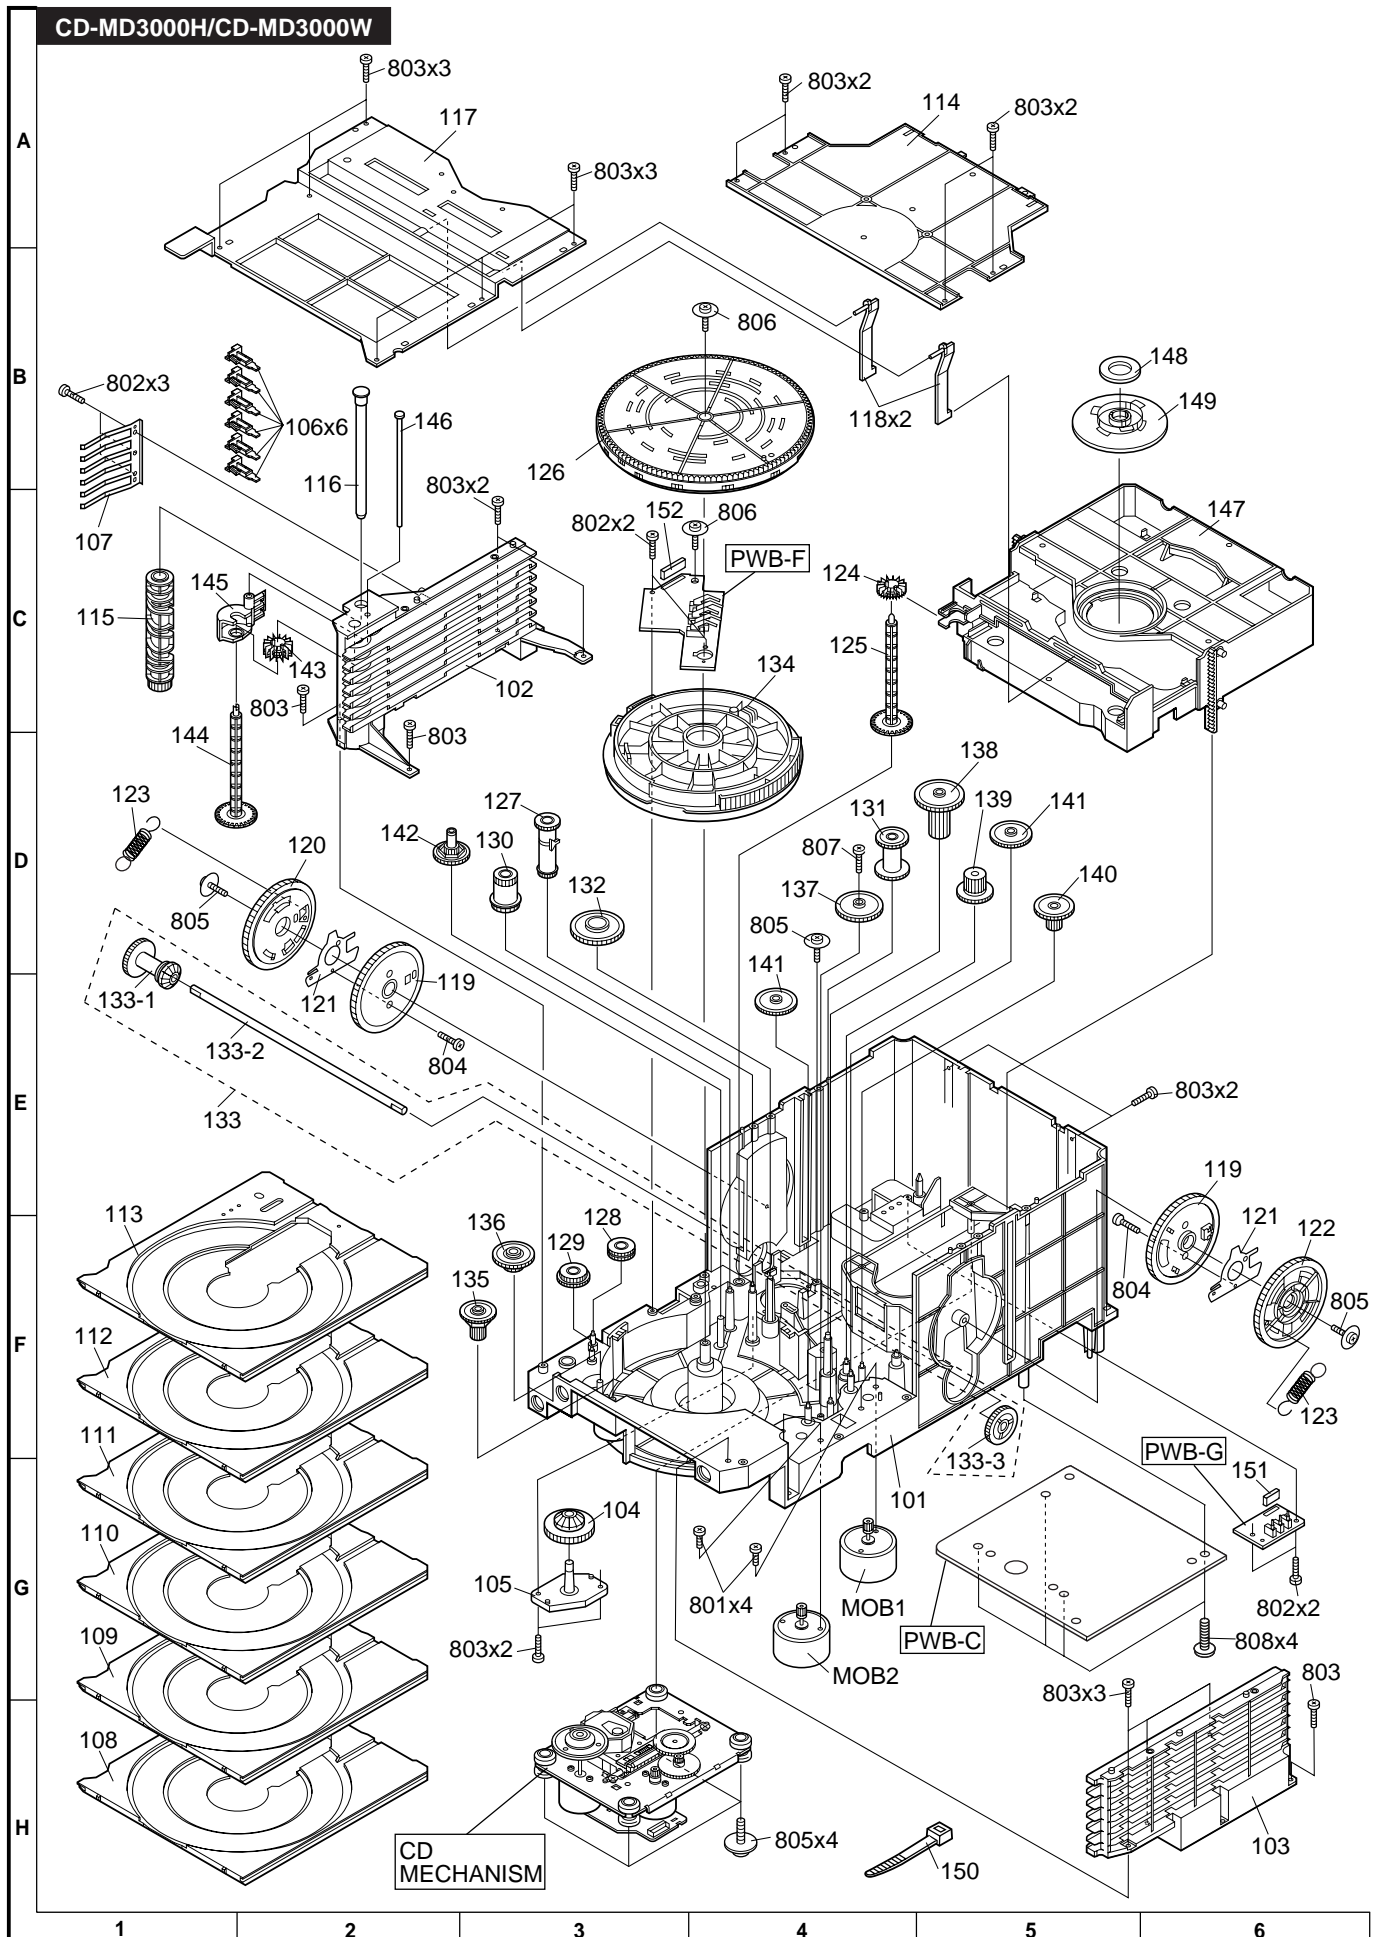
CD CHANGER MECHANISM EXPLODED VIEW
